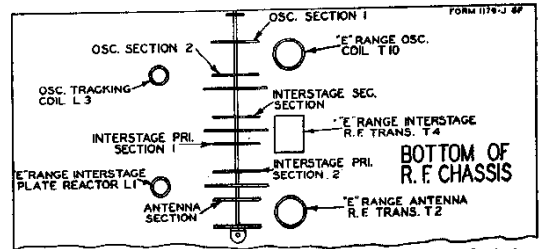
Bottom View of Chassis Showing Coil and Switch Section Location
